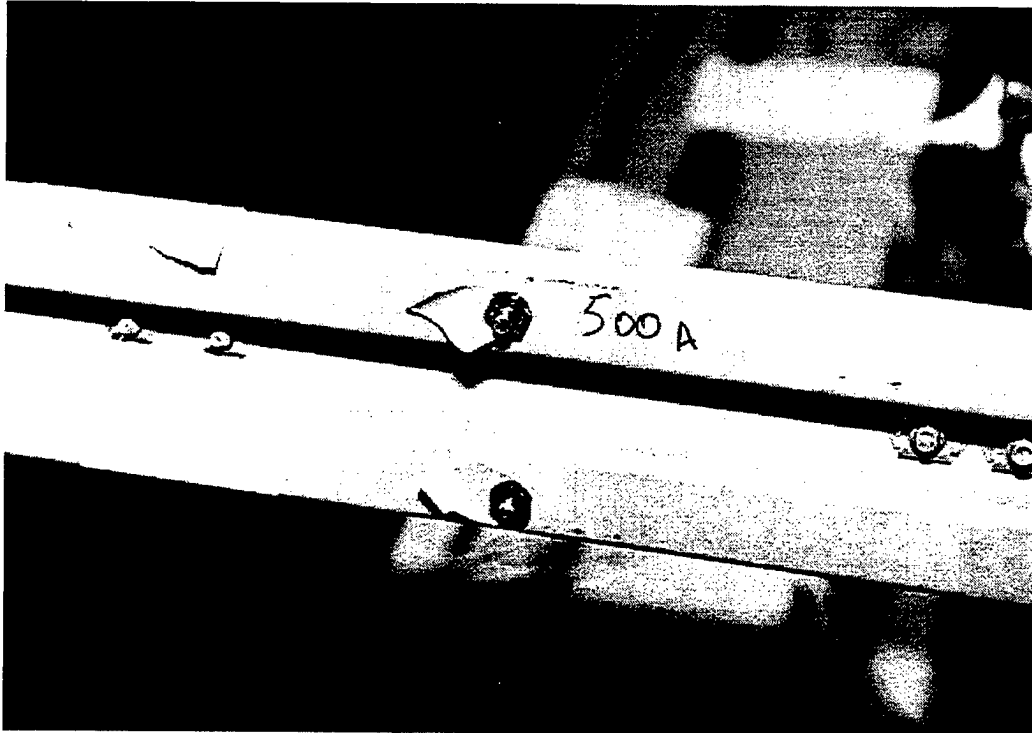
POSTTEST BIN A UPPER RAIL (FS500A) DETACHMENT VIEW
